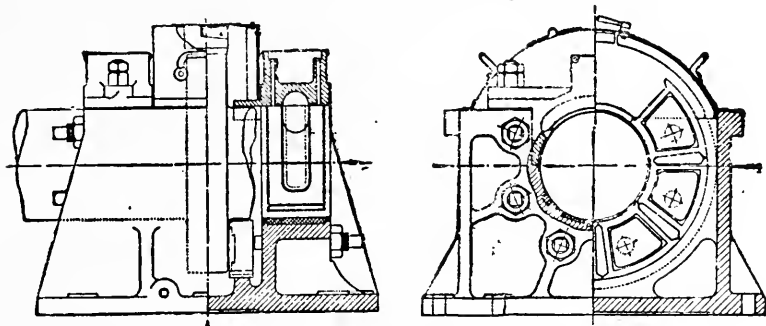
Self-contained Michel Marine Thrust Bearing.
